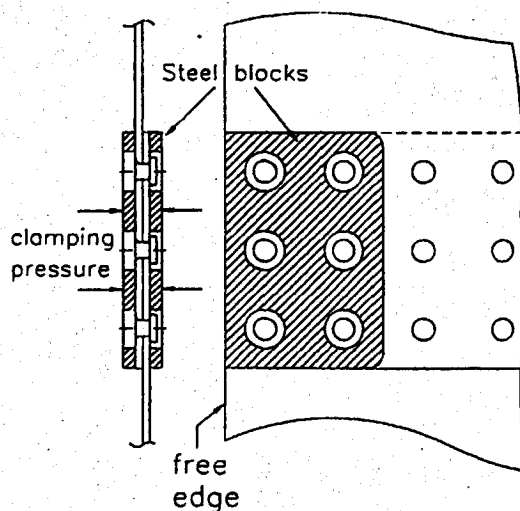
Steel blocks attached to the flat specimen edges to reduce local secondary bending [ref. 3].
